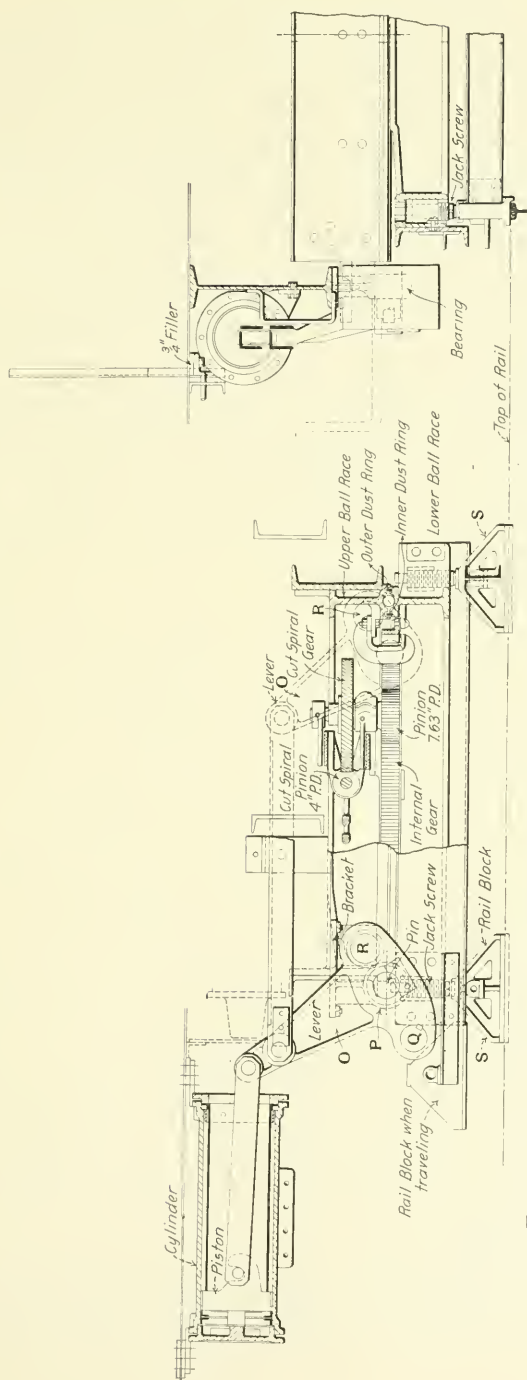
PLAN AND SIDE AND FRONT ELEVATION OF HYDRAULIC TURNTABLE OF LOCOMOTIVE PILE DRIVER
